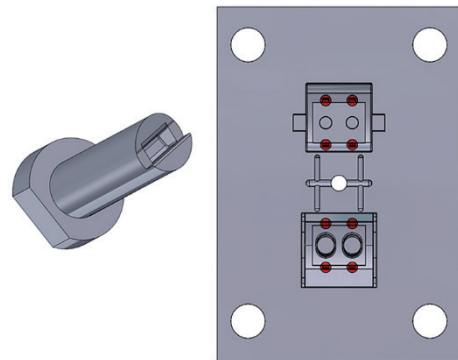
Air venting insert CAD model and locations at mould parting plane [6]
